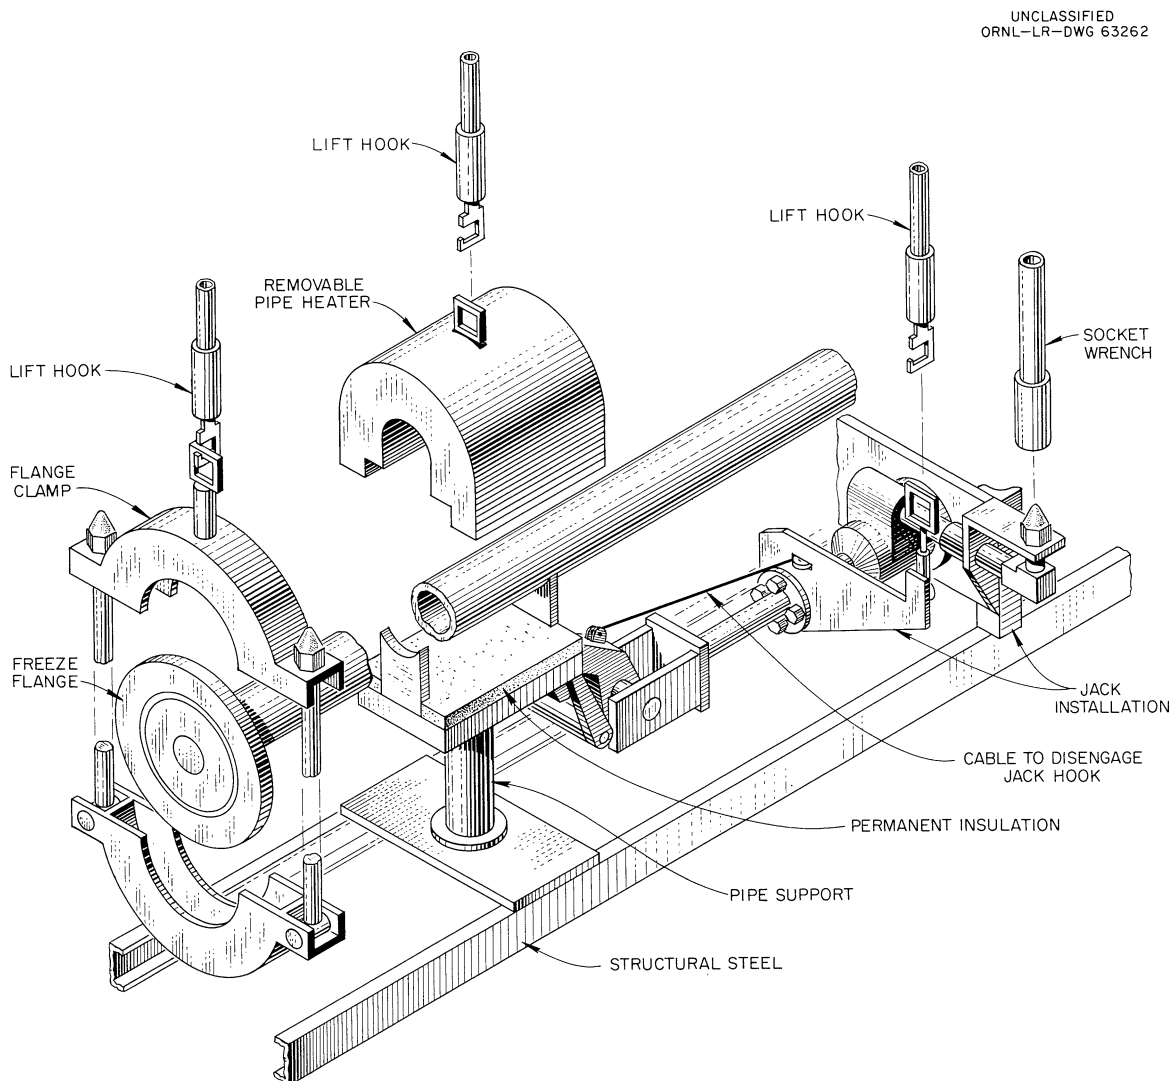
Equipment for Jacking Flanges Apart in the MSRE.
